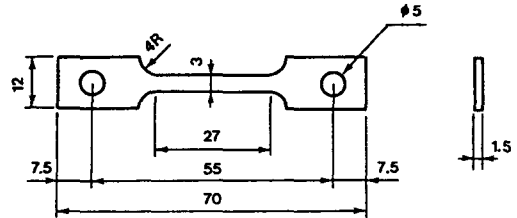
Stress corrosion cracking test specimen(unit : mm)
